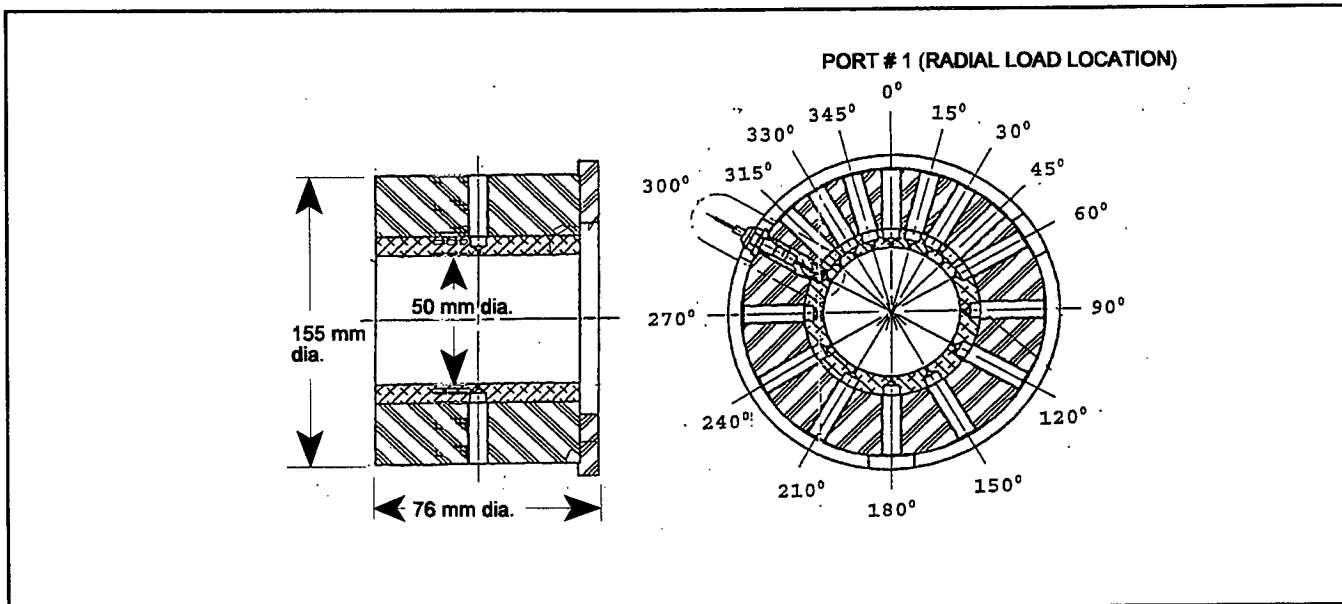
PRESSURE PORT LOCATIONS ( MIDDLE OF BEARING LENGTH)
